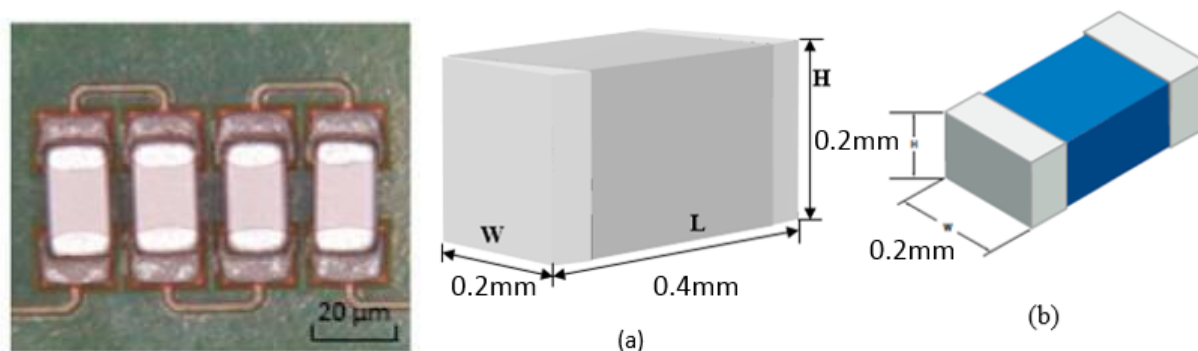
FR4-printed circuit board (PCB) and outline of 01005 capacitor model
